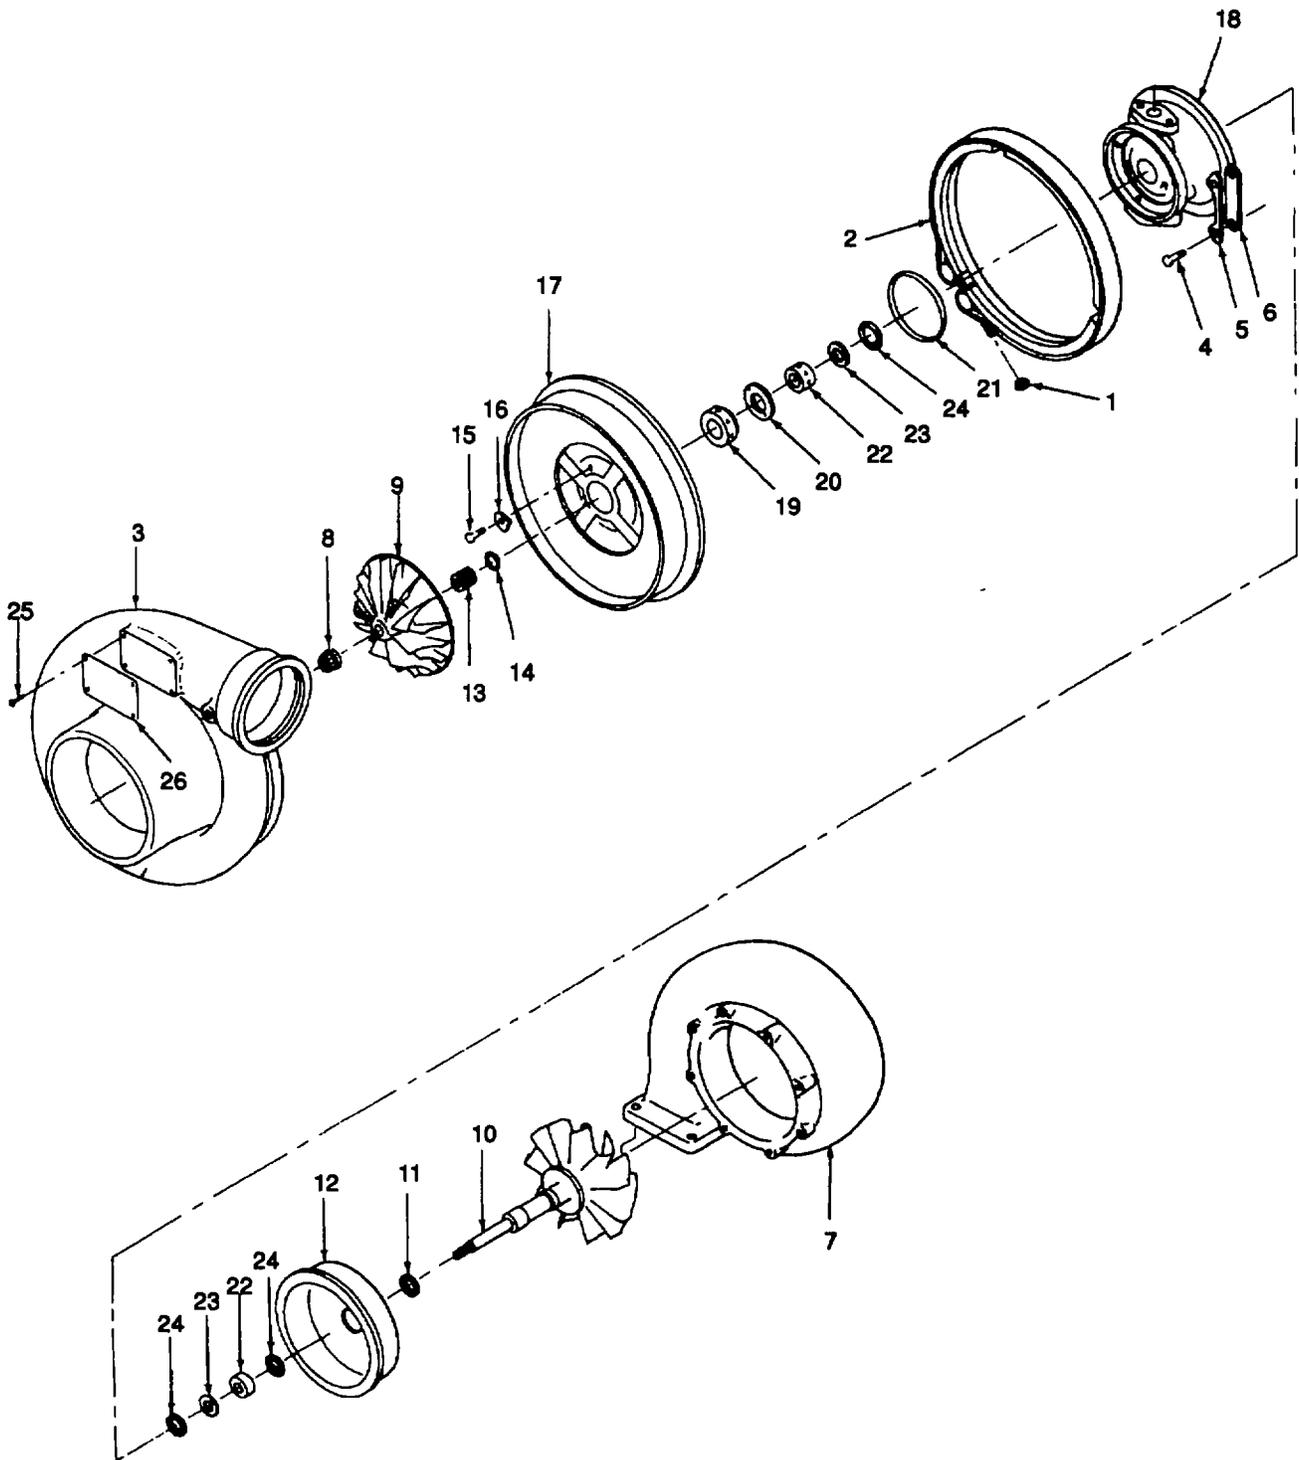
Disassembly and Assembly of Turbocharger (Sheet 1 of 2)
